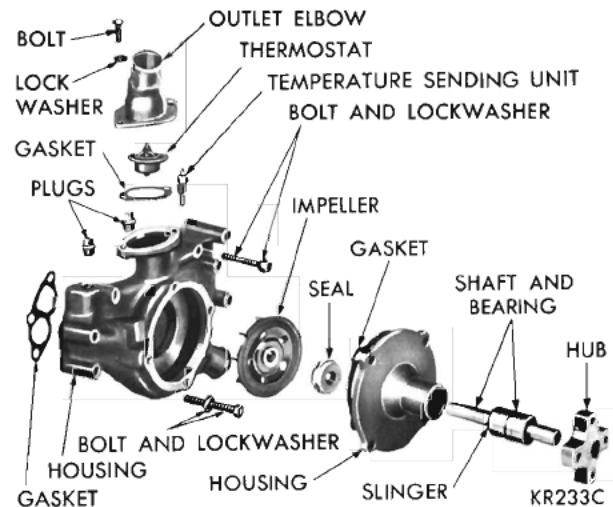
361-383-426 Cubic Inch Engine Water Pump
